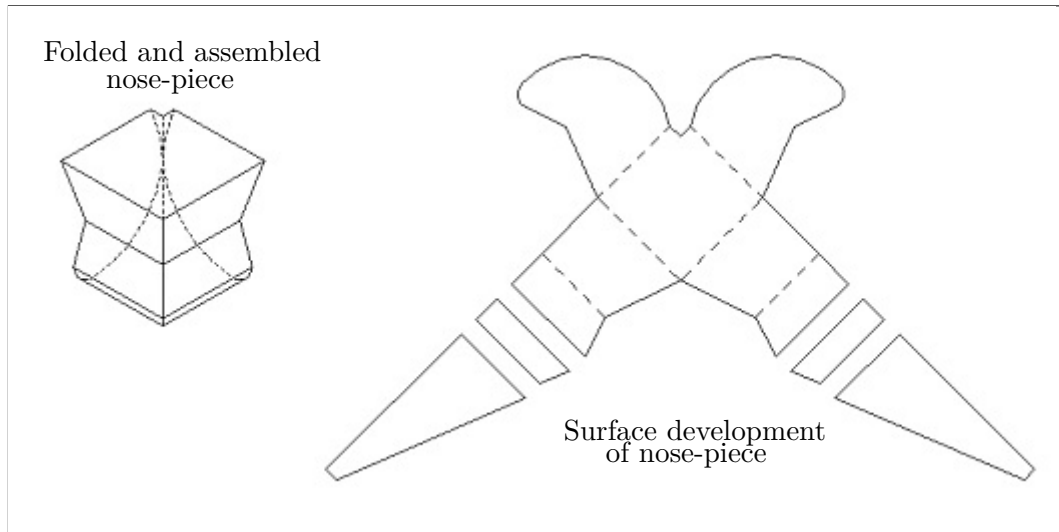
Nose-piece surface development and isometric view drawings.
